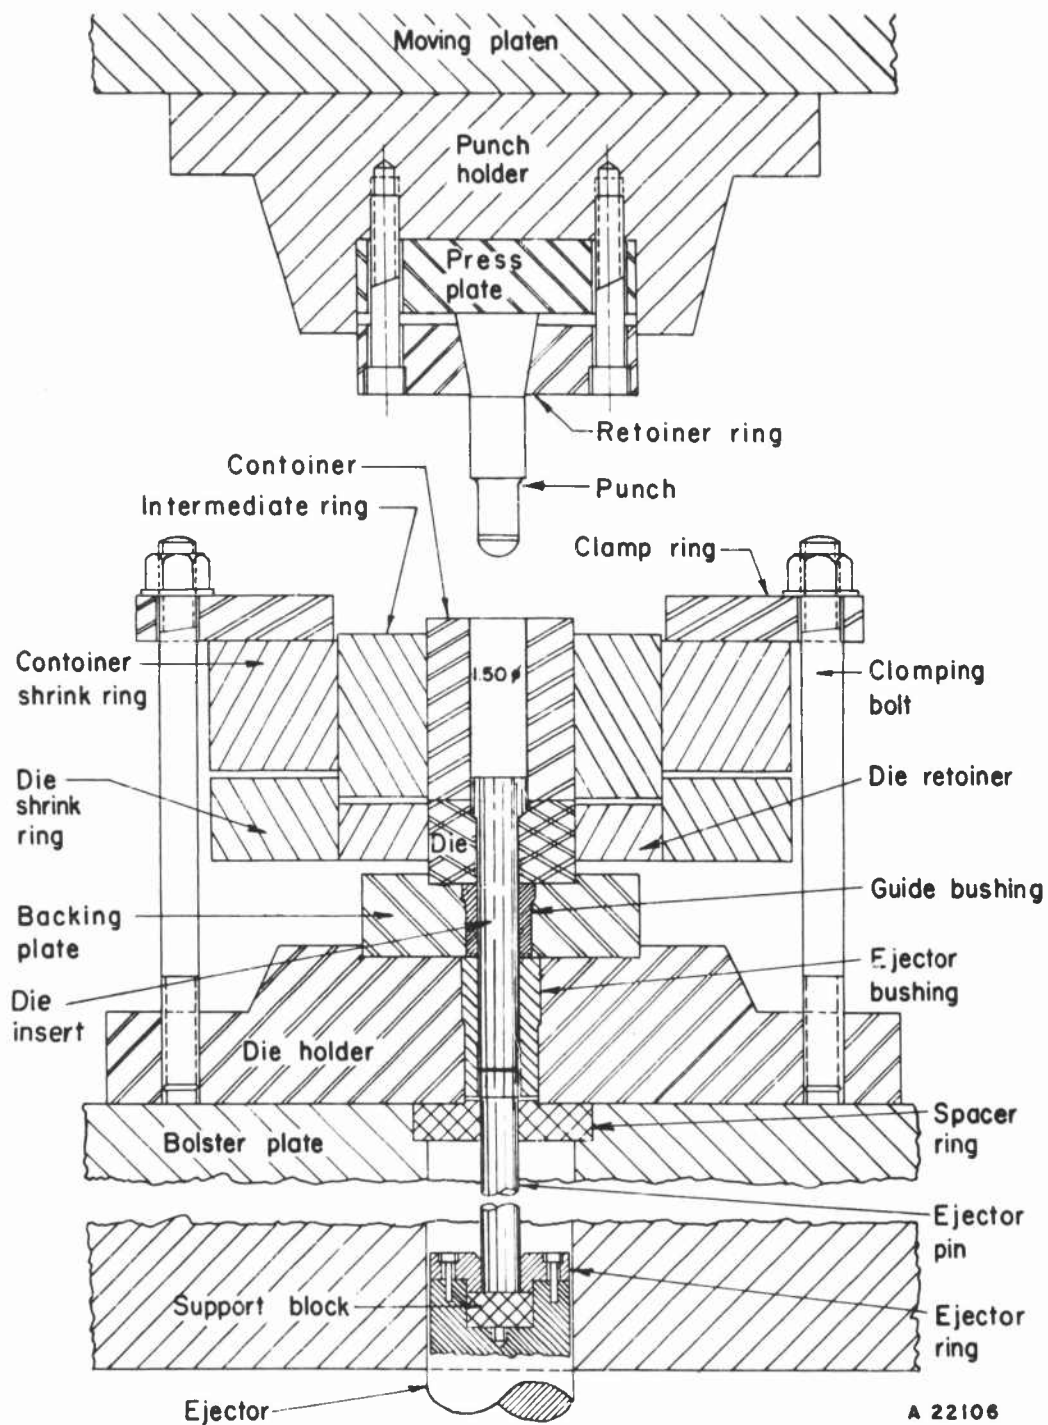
ASSEMBLY DRAWING OF THE EQUIPMENT FOR BACKWARD EXTRUSION OF CUPS
